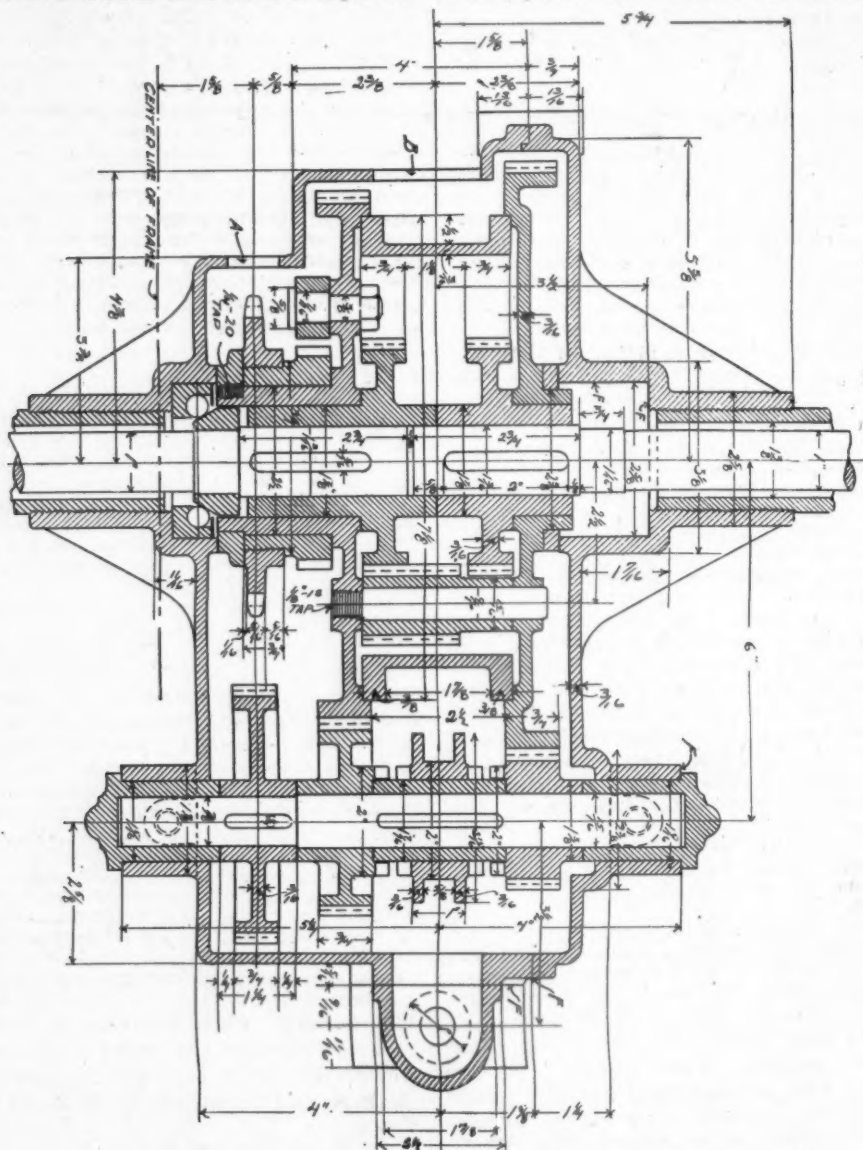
SECTIONAL VIEW OF GEAR CASE.
